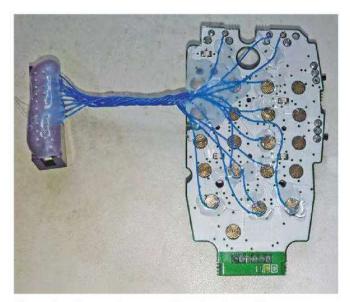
Connections are soldered to the pushbutton swirl pad traces.
